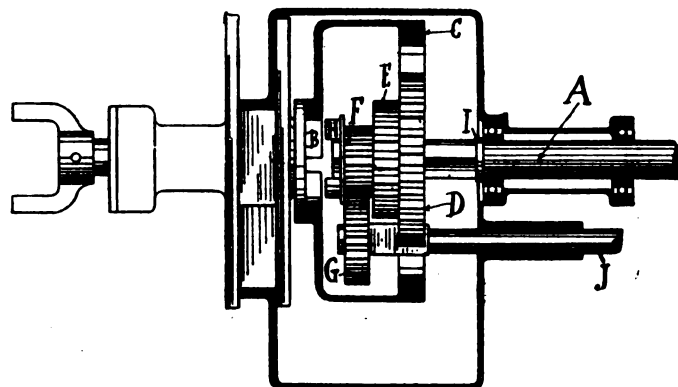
Sectional Plan View of New Bozier Change Speed Gear.
